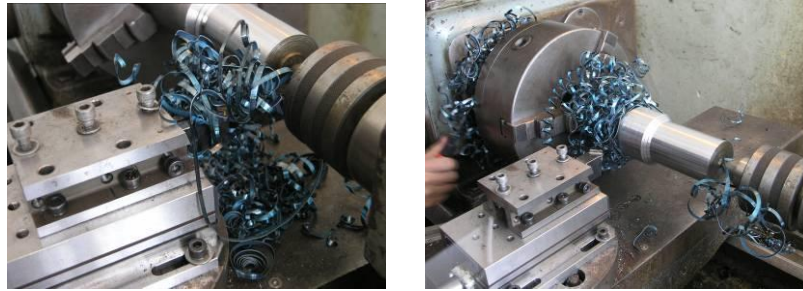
The chip winding when machining 2.25Cr-1Mo-0.25V
